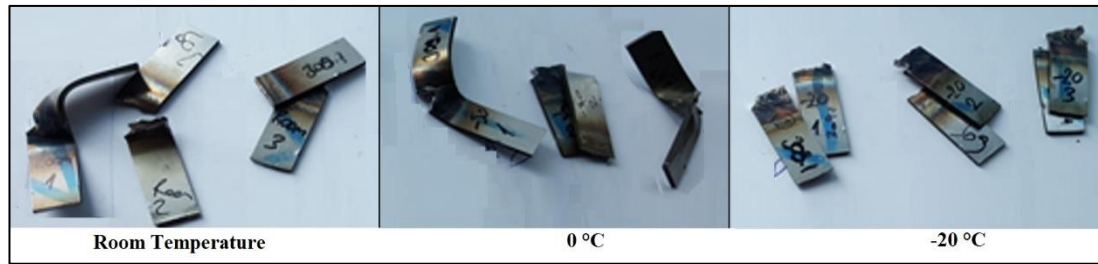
Macro images after impact notch test of samples with ER309 coded filler.
